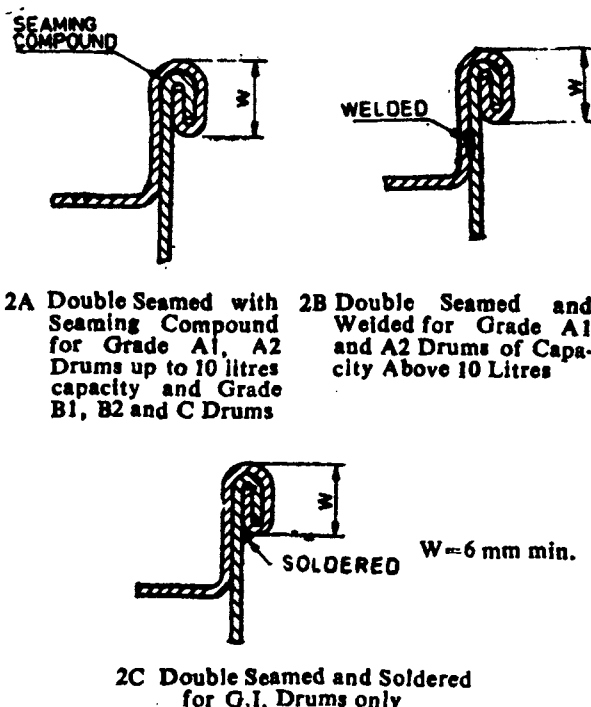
TYPICAL END SEAMS (TOP AND BOTTOM)
